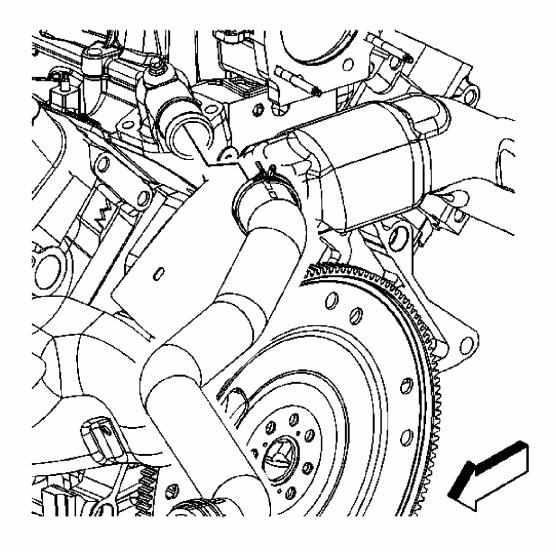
Locating Inlet Hose Clamps Courtesy of GENERAL MOTORS CORP.
